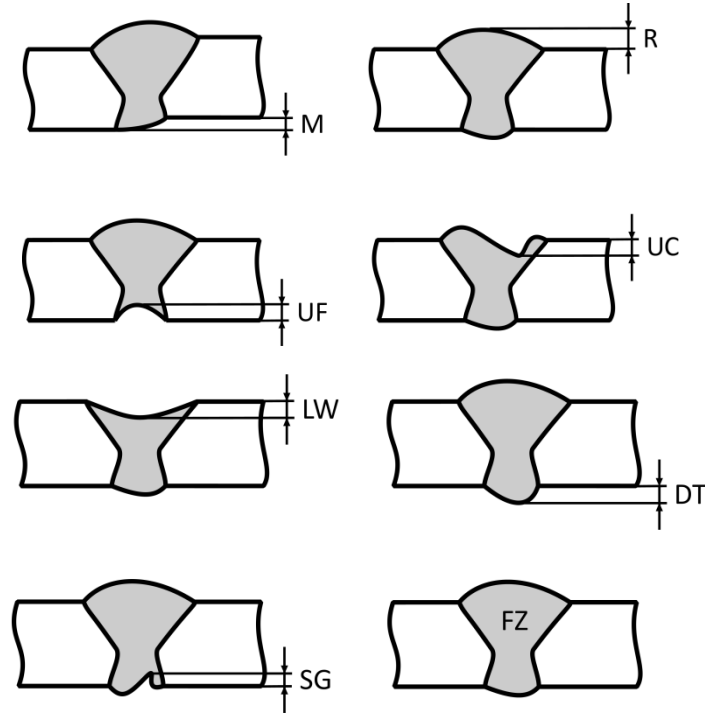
Common defects in laser beam welding to be investigated, as requested in customer specification
